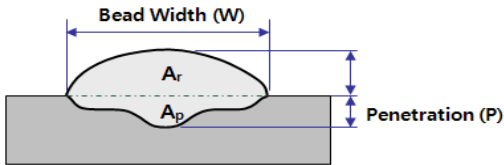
Schematic diagram for measurement of weld bead geometry
